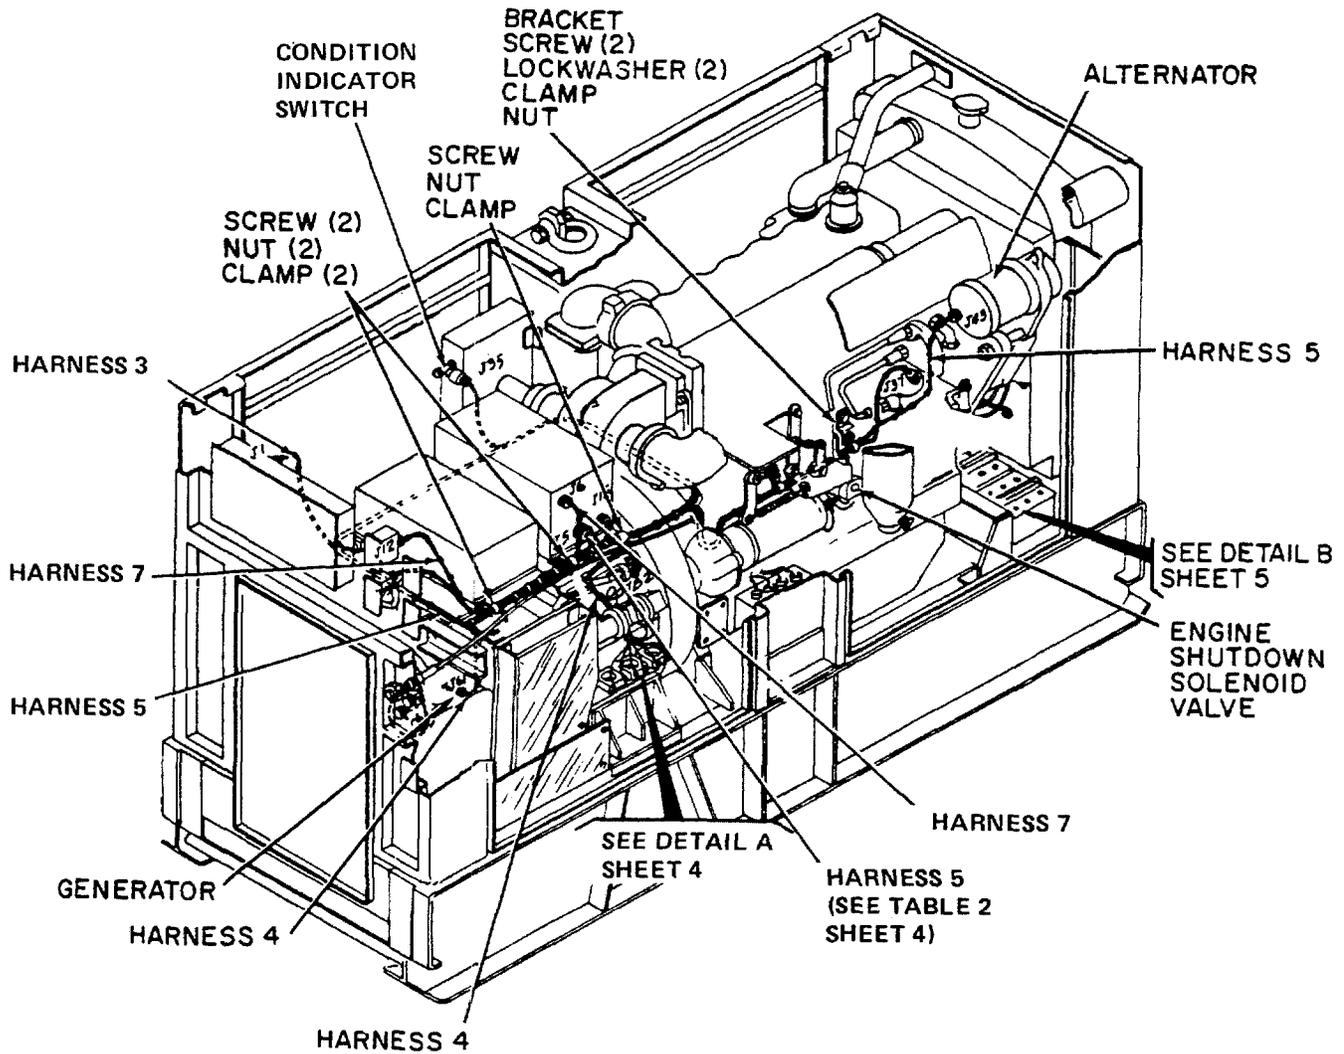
Wiring Harnesses, Removal and Installation (Sheet 3 of 5)
